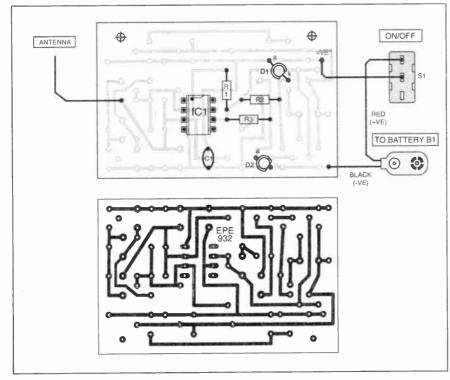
Component layout on the multi-project printed circuit board and full-size copper foil master. Double-check layout as not all holes are used.
